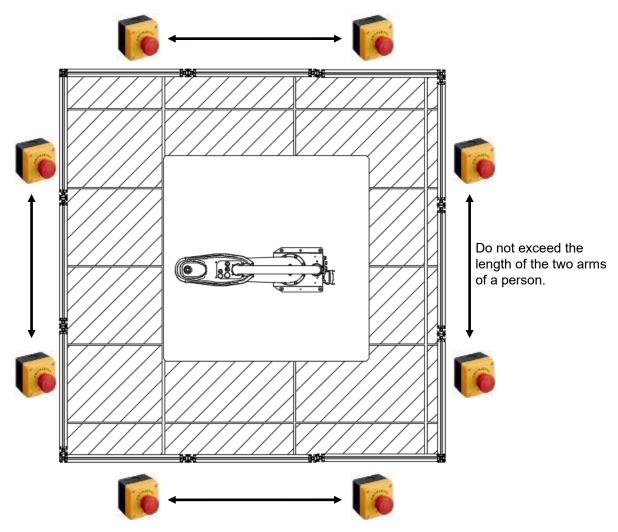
10 Example of installing multiple emergency stop switches outside the railing
